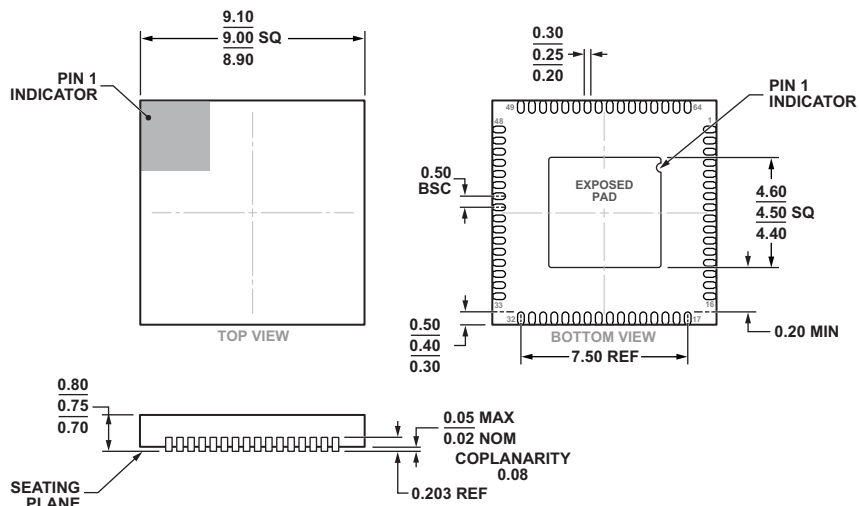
64-Lead Frame Chip Scale Package [LFCSP_WQ]
